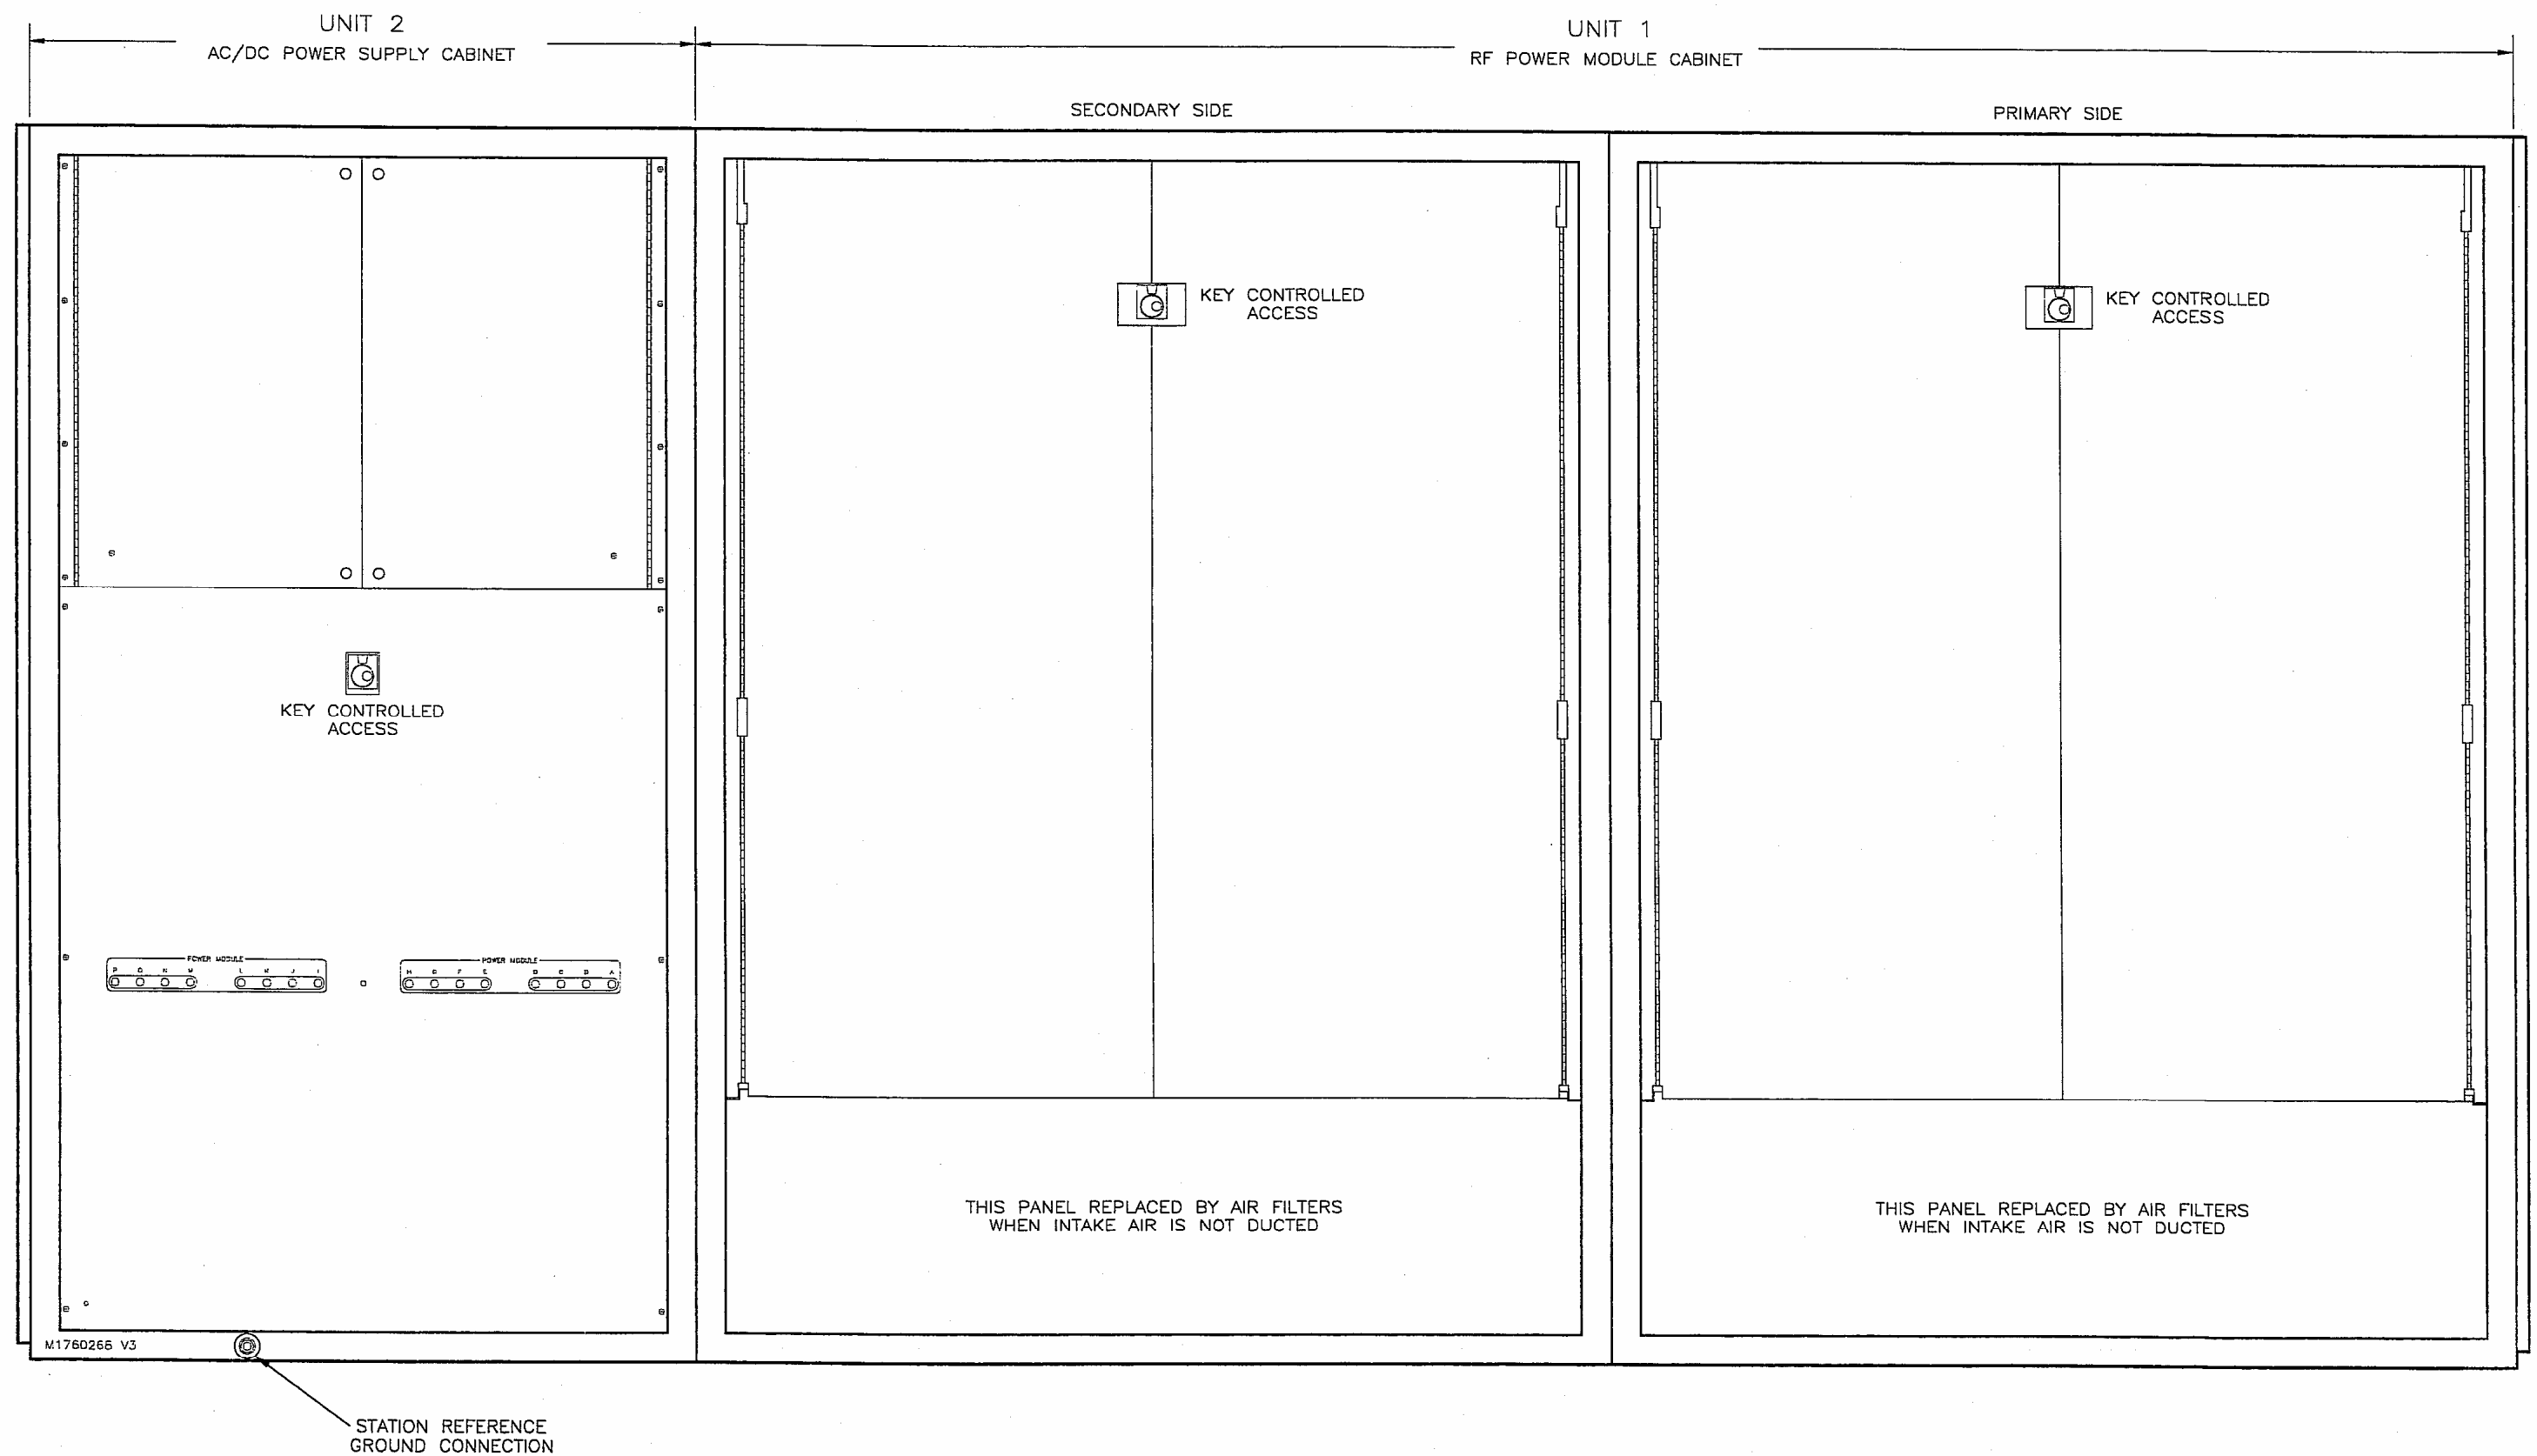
Assembly Detail - NA100 100kW AM Broadcast Transmitter (Rear)
